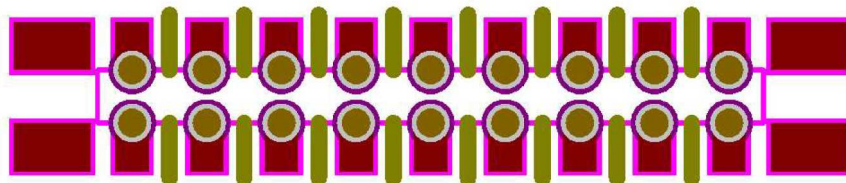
Plug-in PCB Land Pattern (Unit: mm)
